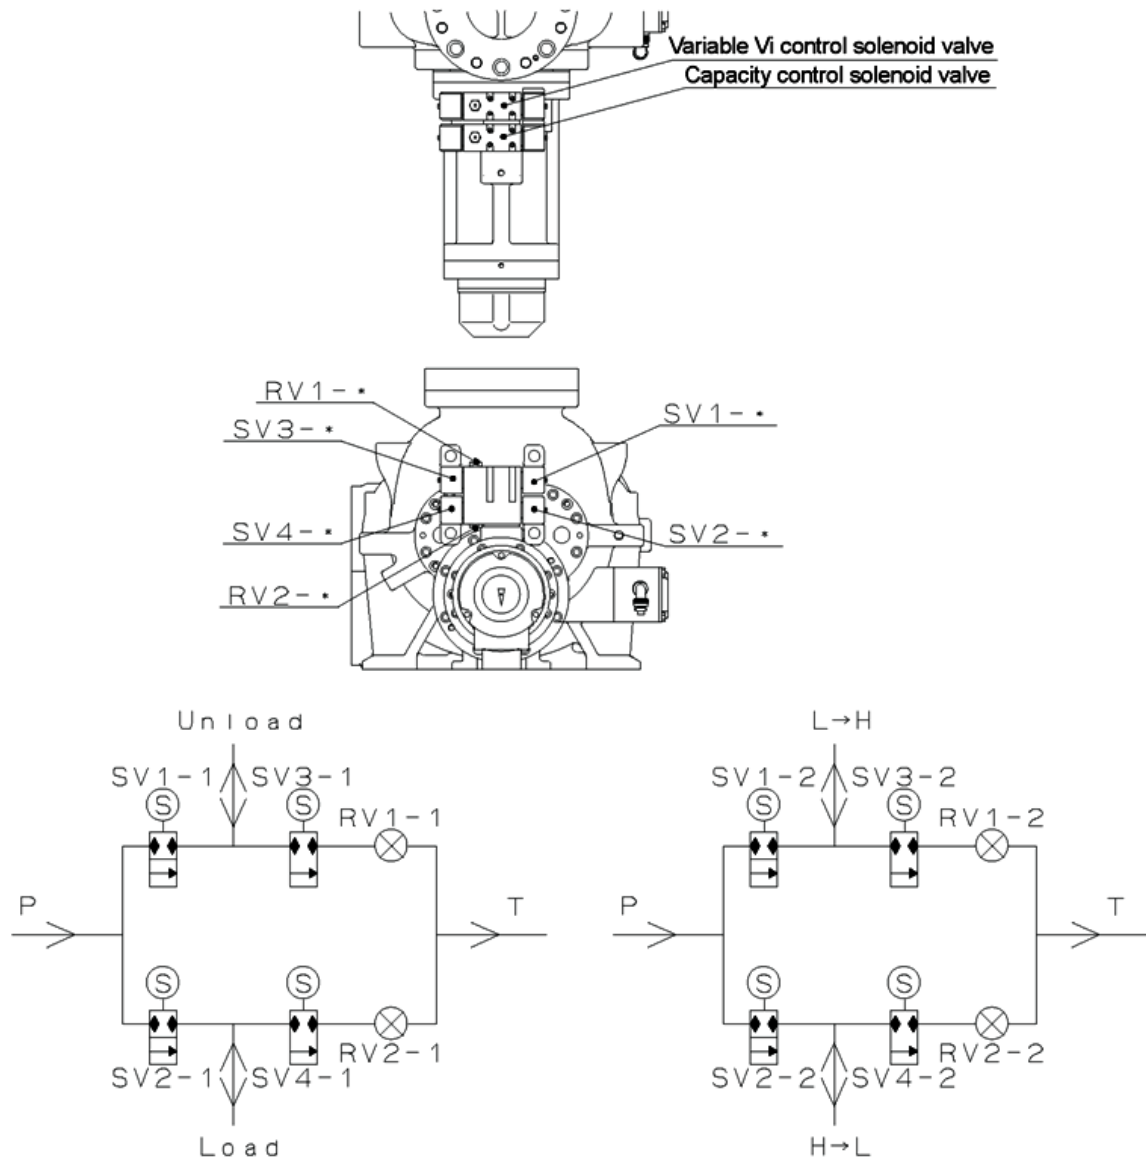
Hydraulic Circuit for Solenoid Valve Assembly
